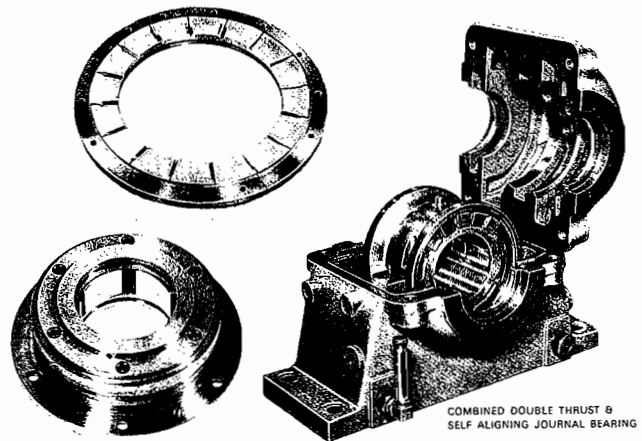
Bearing Hardware. (Courtesy of Waukesha Bearings Corp. and Michell Bearings Ltd.)
